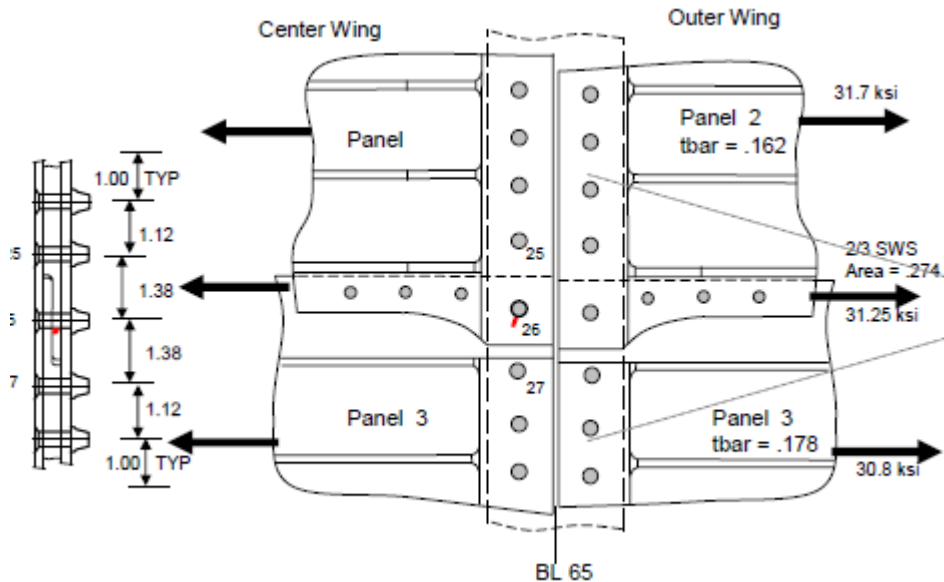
P-3C Lower Wing Panel Splices – Plan View
